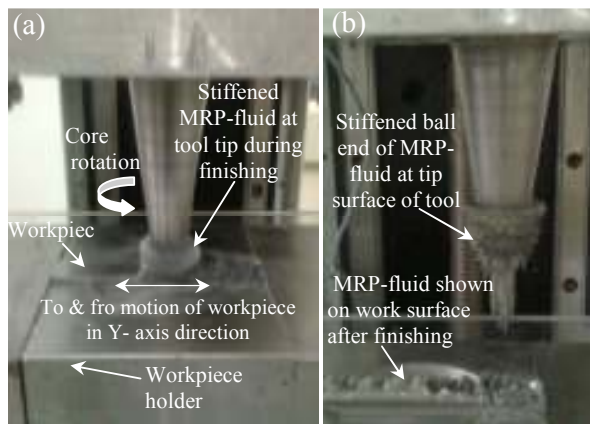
Stiffened MRP- fluid at the tip surface of MR finishing tool is shown (a) during finishing on workpiece surface and (b) after finishing where electromagnet still kept ON
